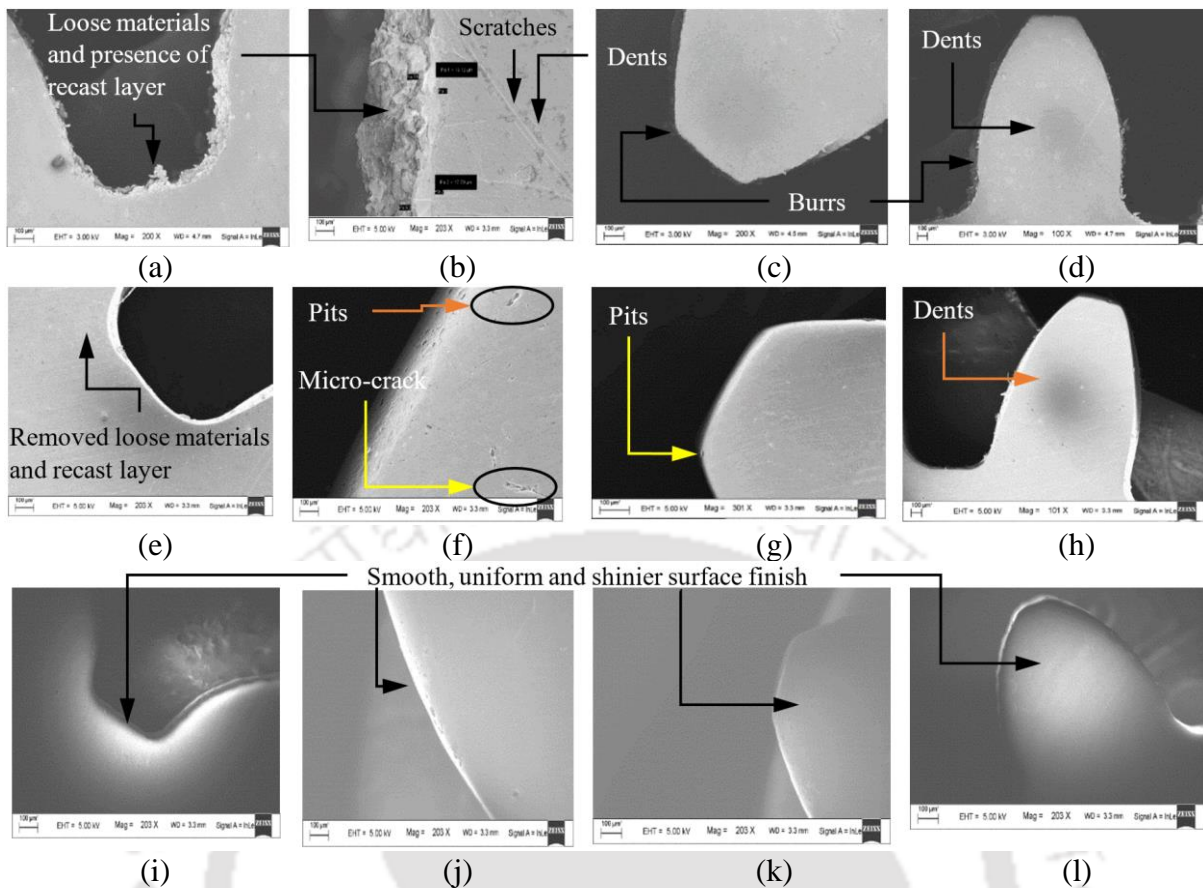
FESEM images of tooth (a) in-between, (b) involute, (c) top and (d) face profiles of miniature gear before finishing, tooth (e) in-between, (f) involute, (g) top, and (h) face profiles of miniature gear after finishing without using uniform flow restrictor, and tooth (i) in-between, (j) involute, (k) top and (l) face profiles of miniature gear after finishing with uniform flow restrictor
